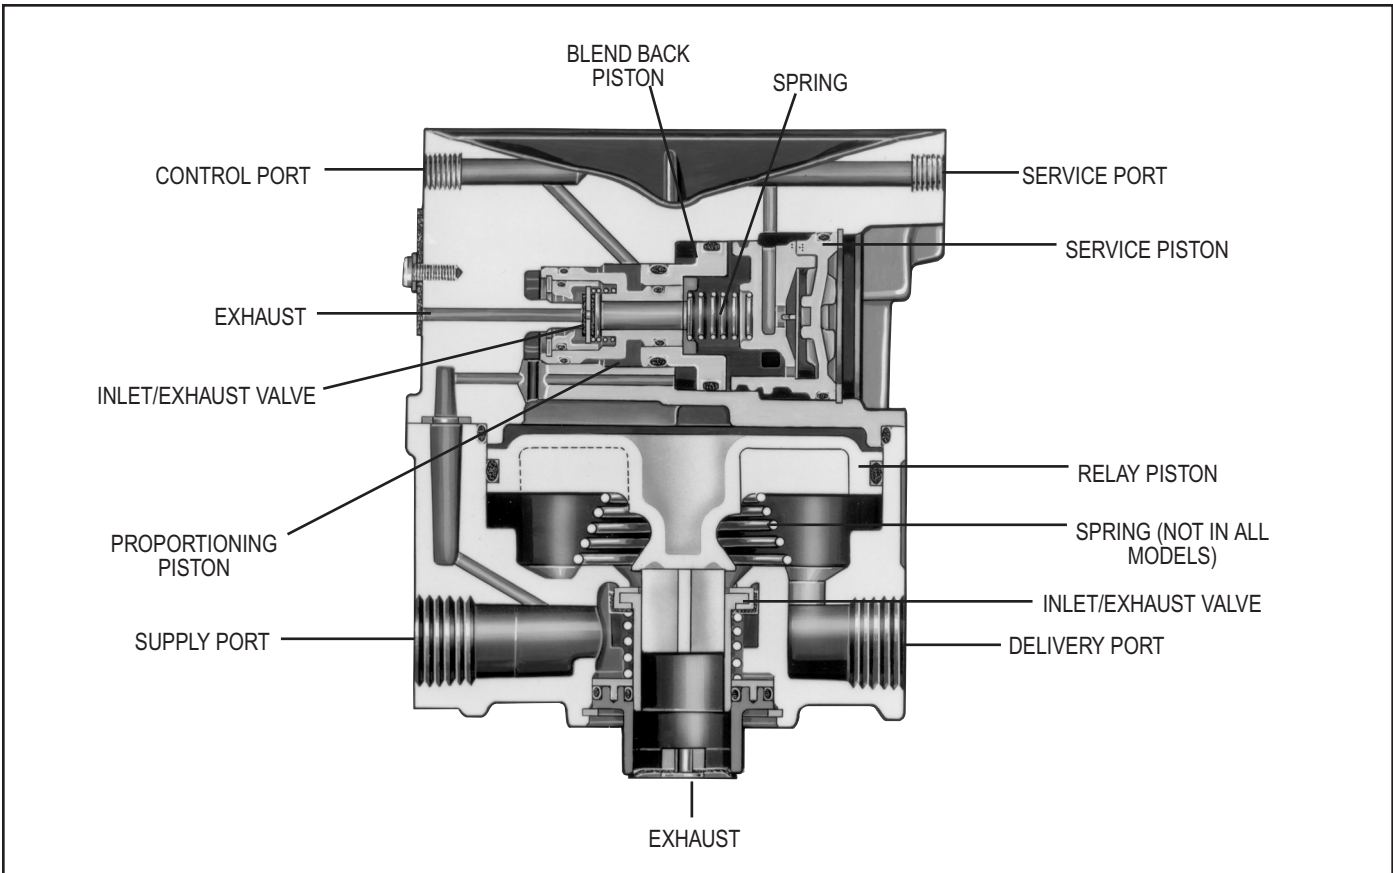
SECTIONAL VIEW BENDIX® AR-2™ ANTILOCK RELAY VALVE
